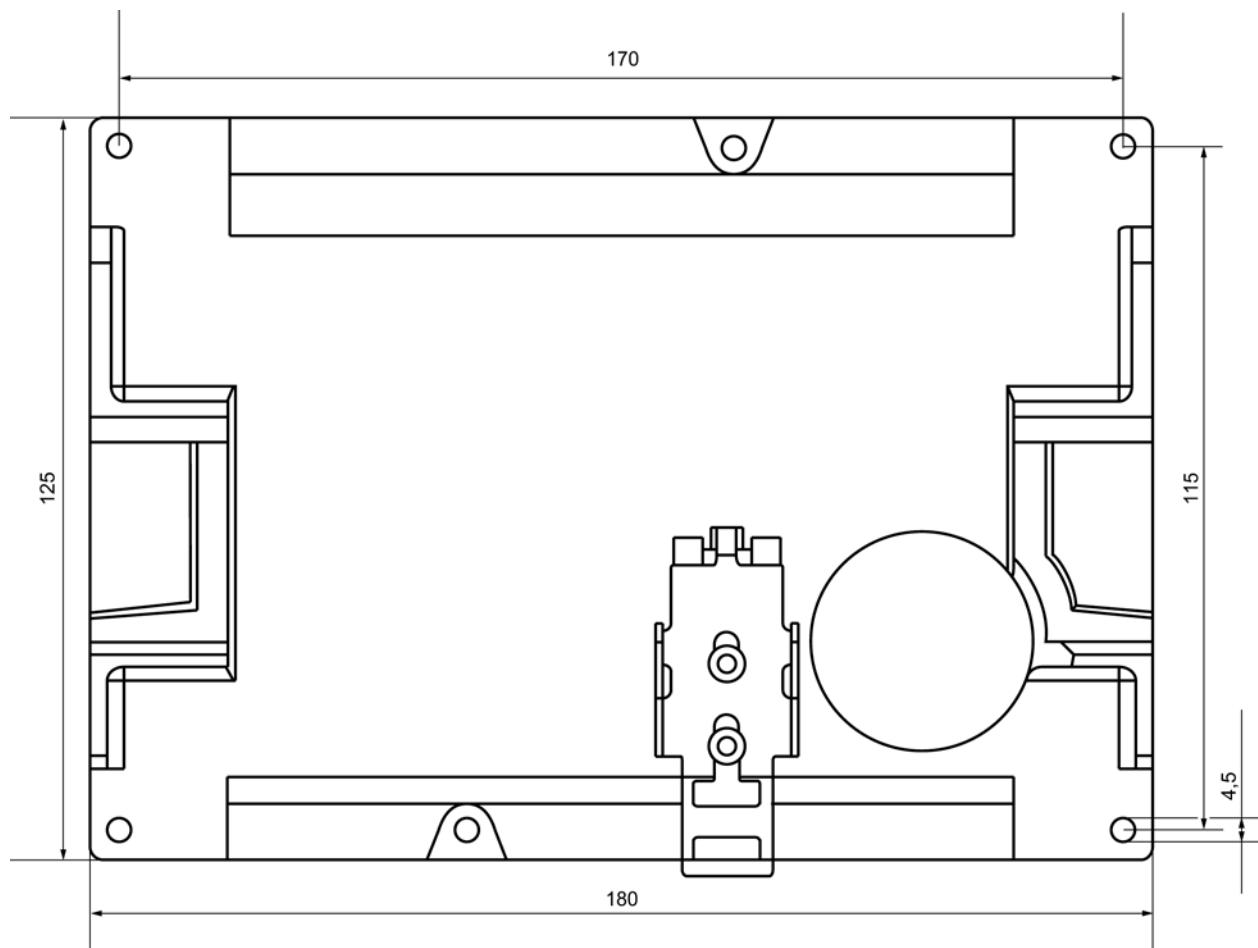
Dimension drawing, rear of the SCALANCE X124
